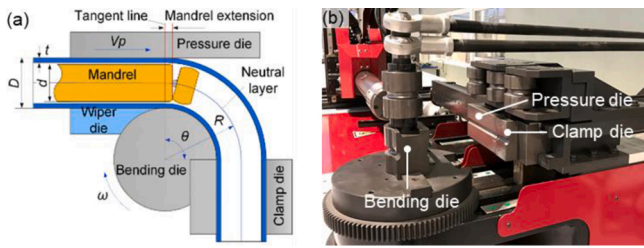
RDB process: (a) bending principle; (b) machine and tooling system.
